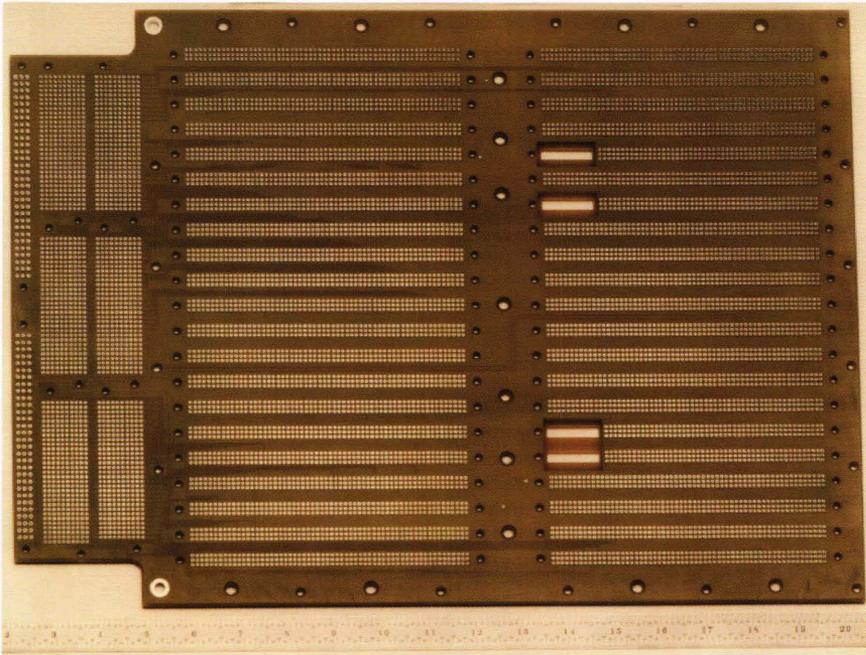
Example of a multilayer epoxy-glass printed wiring board fabricated in the recently certified Printed Wiring Board Facility of APL's Engineering and Fabrication Branch. The board is 13 in. \times 18 in. and contains twenty-four layers (seventeen signal, five power/ground, and two external pad layers).
